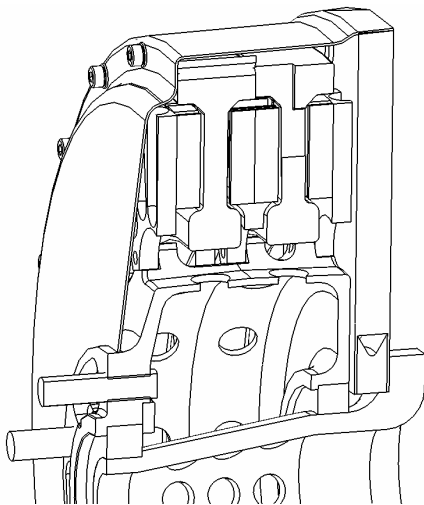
Cross section of the UltraCommuter Rear Wheel Mounted Direct Drive Motor
